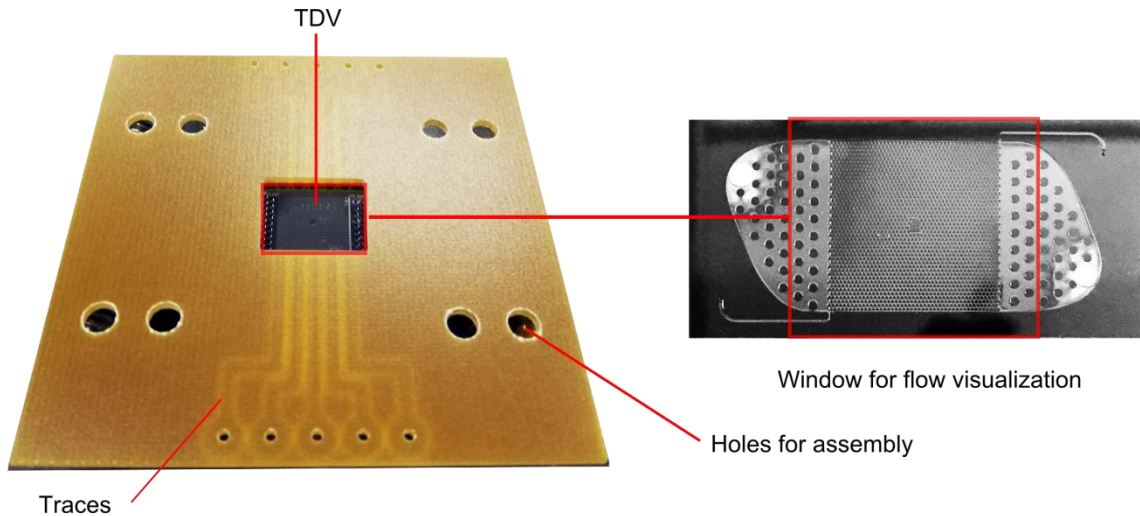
Upper side of the TDV/PCB assembly and its main features.
